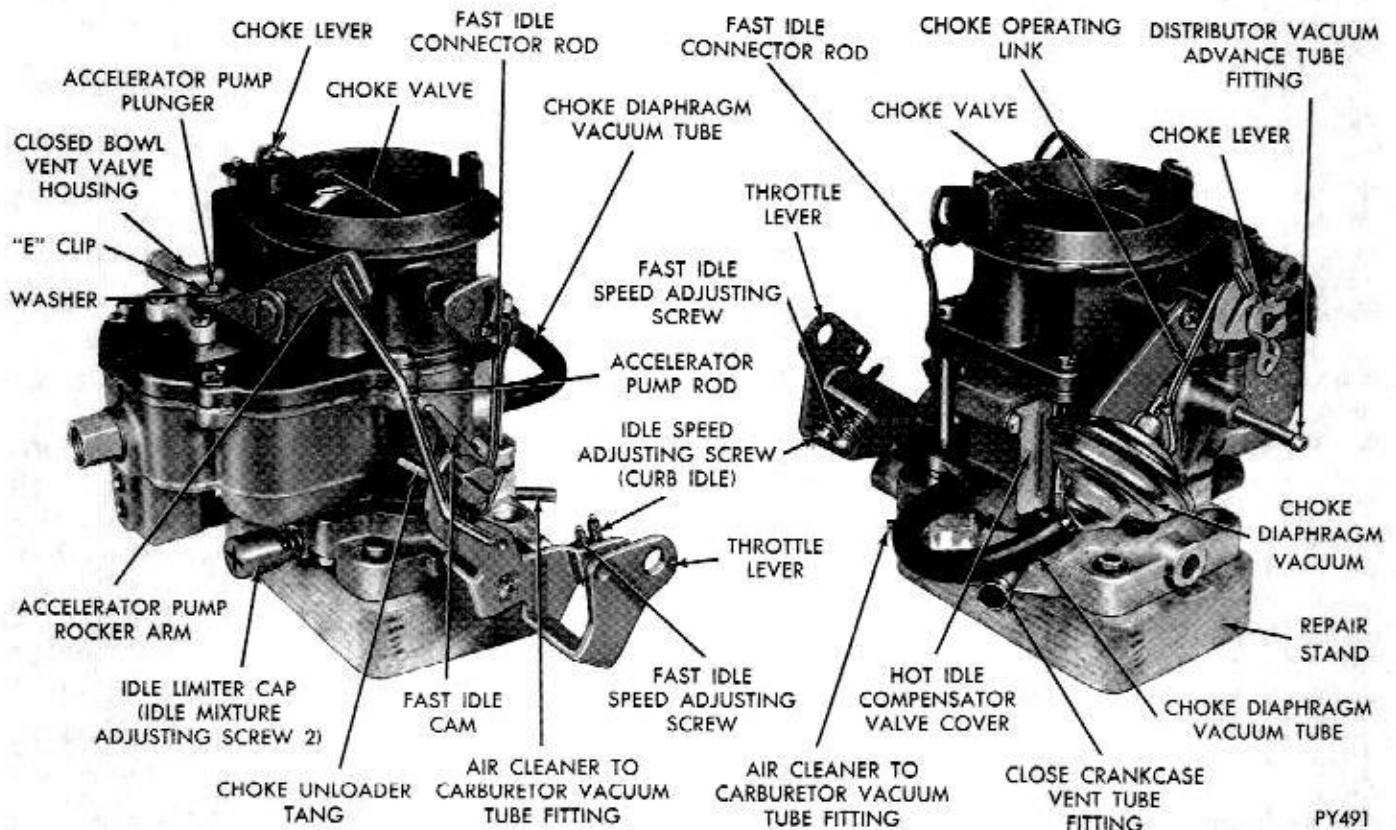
Carburetor Assembly (1-1/4 inch BBD) E.C.S.
